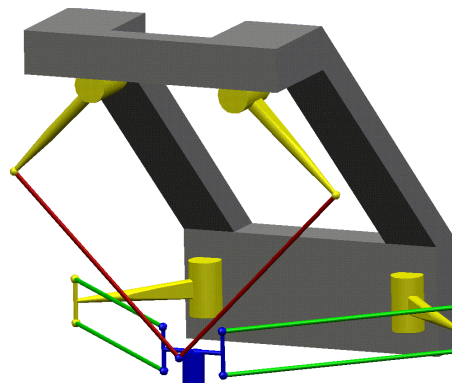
H4 mechanism with 4 rotary drives and an asymmetrical design.
